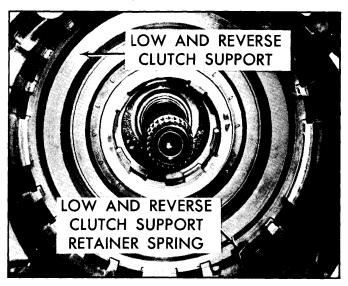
Installing Low and Reverse Clutch Support Assembly
